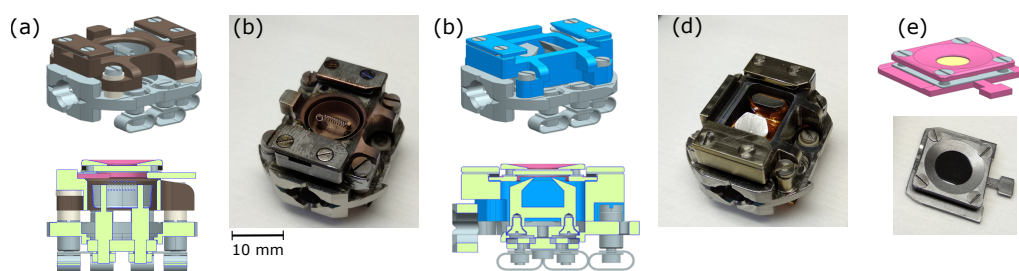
3D drawings (a) and picture (b) of the high temperature sample holder base with the electrically insulated filament in the center. 3D drawings (c) and picture (d) of the electromagnet sample holder base with an uniaxial in-plane electromagnet. (e) Platelet transferred between both holder types.
